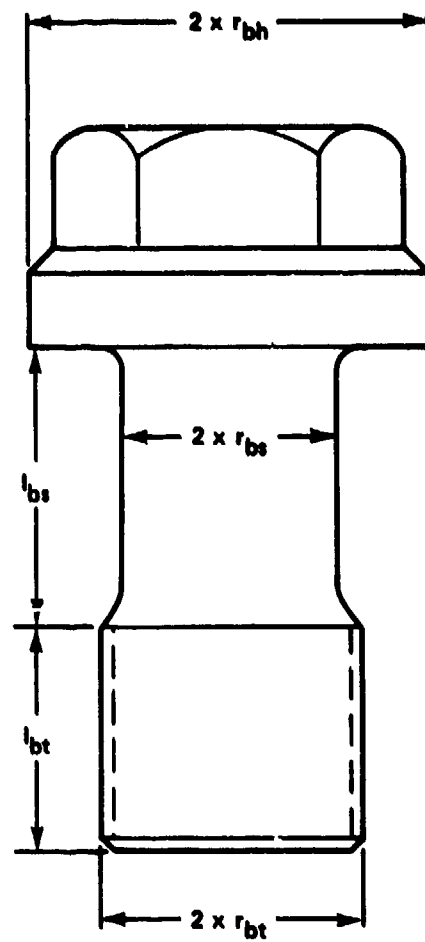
Dimensions Used in Table 8 for Blade Bolts
